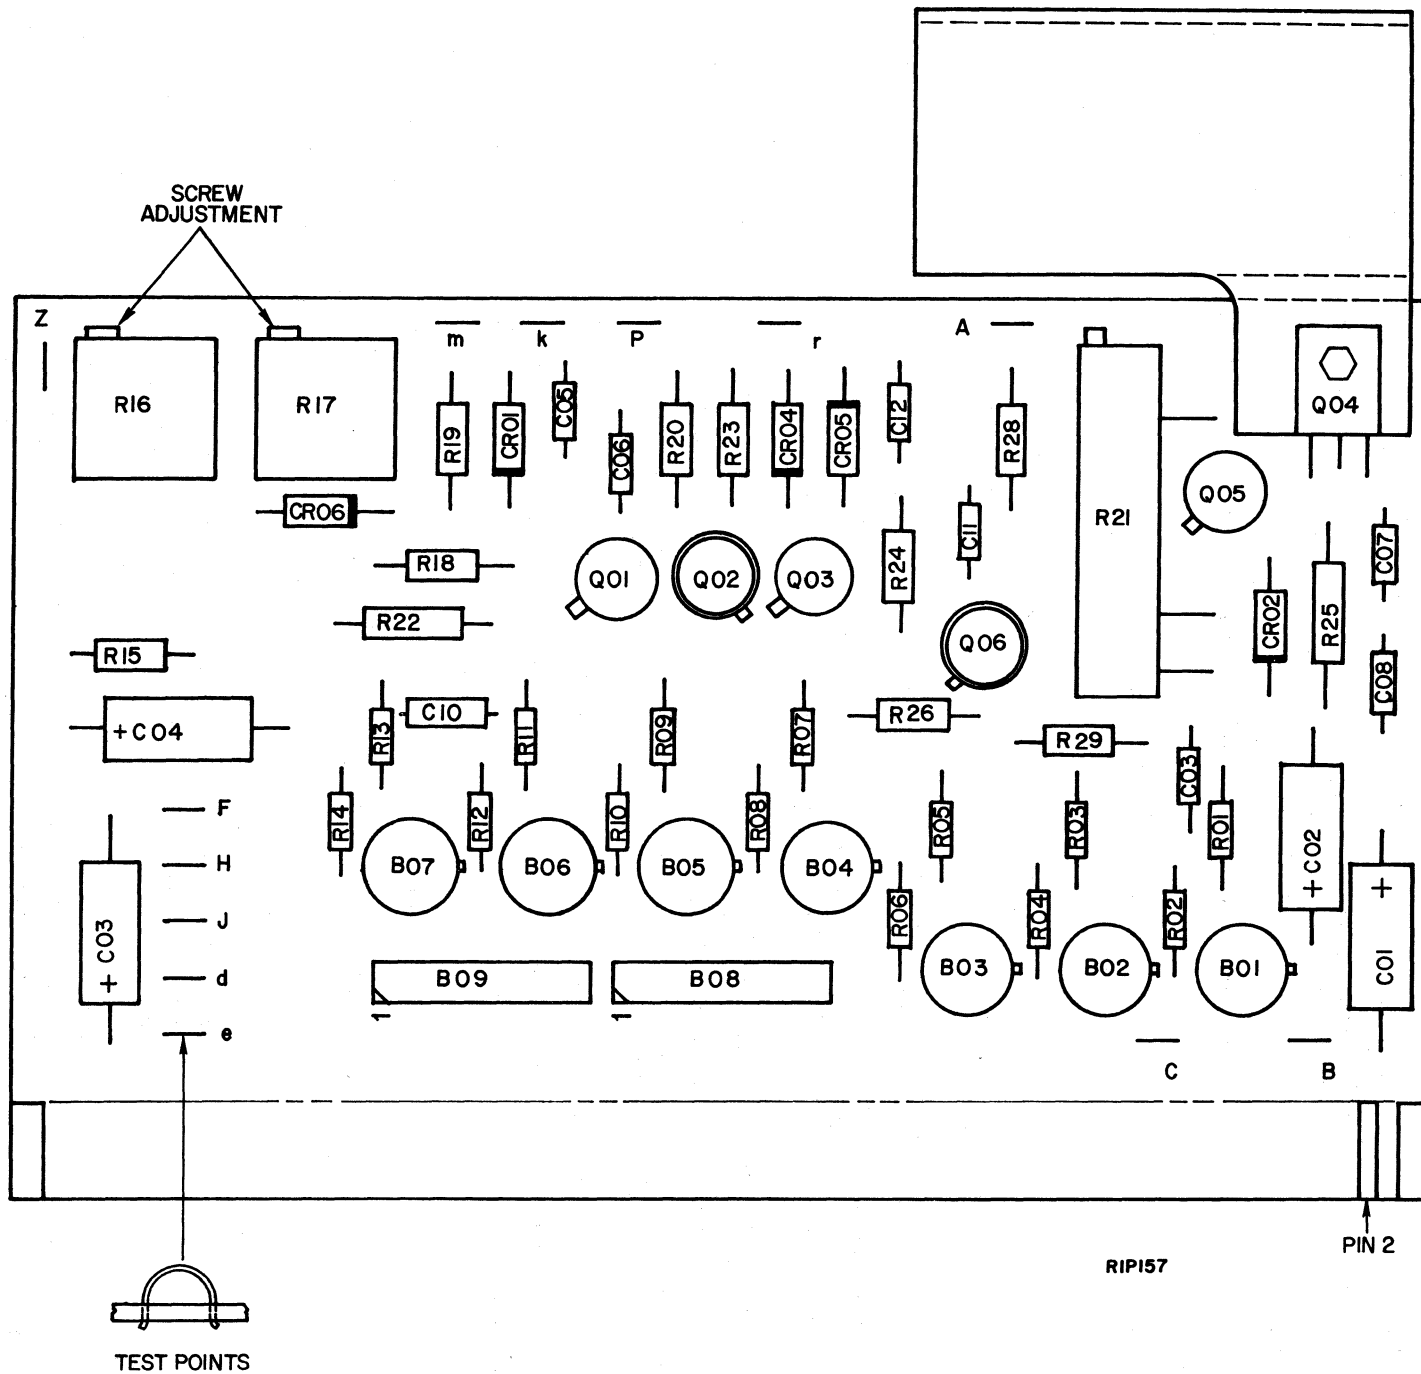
1CIR PC Board Component Location Diagram (Part No. 48847500)
